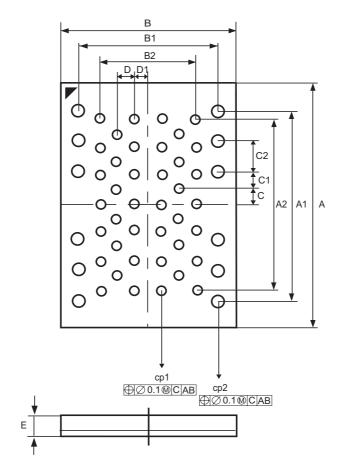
52-TLGA, 12 x 17mm, Package Outline (Top view through package)
